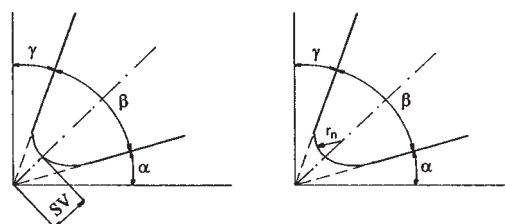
Parameters of measurement of the cutting wedge tool-wear (SV – recession, r_n – radius)
